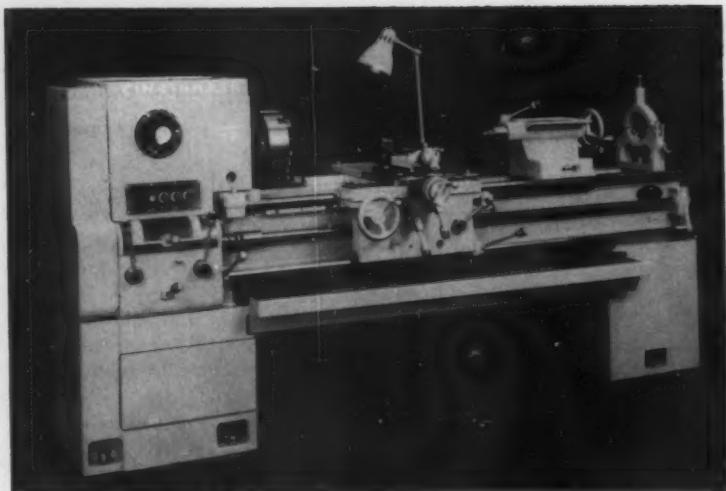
"Hydrashift" geared-head lathe with power dial speed shifting announced by Cincinnati Lathe & Tool Co.
